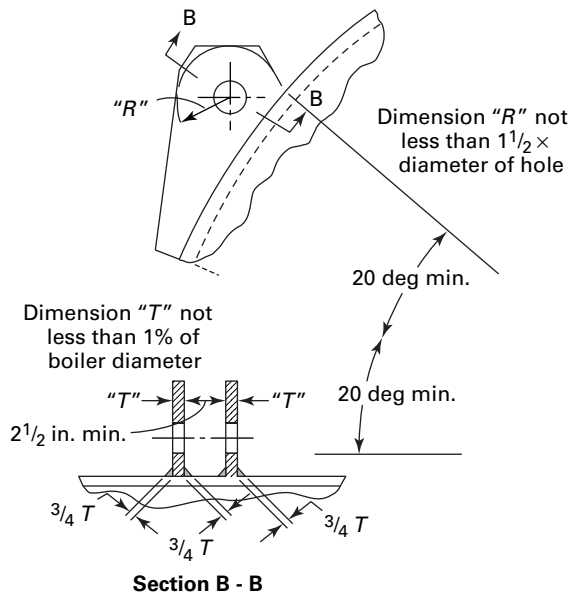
WELDED BRACKET CONNECTION FOR HORIZONTAL-RETURN TUBULAR BOILERS
